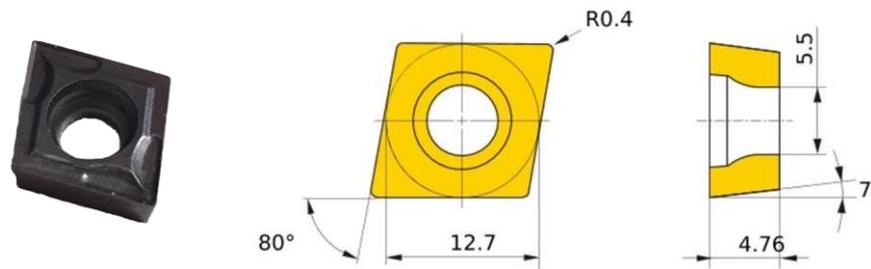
Mitsubishi CCMT120404 tool: (left) real picture; (right) drawing dimensions in mm
